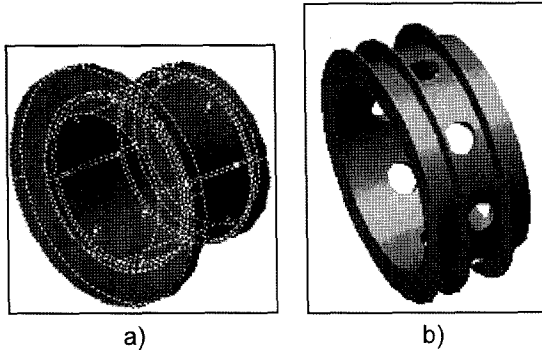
Model of the air bearing. (a)-Internal part; (b)-External part.
